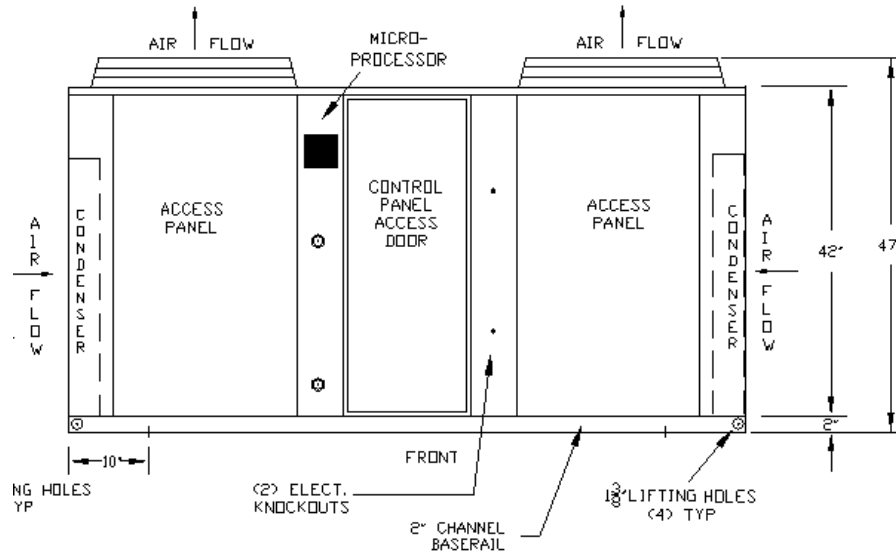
Common Chiller Assembly (Drake Refrigeration)
